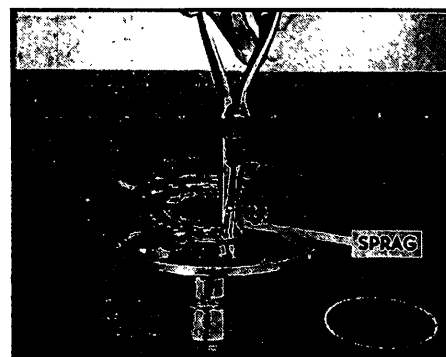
Removing sprag from reactor clutch housing to inspect parts
